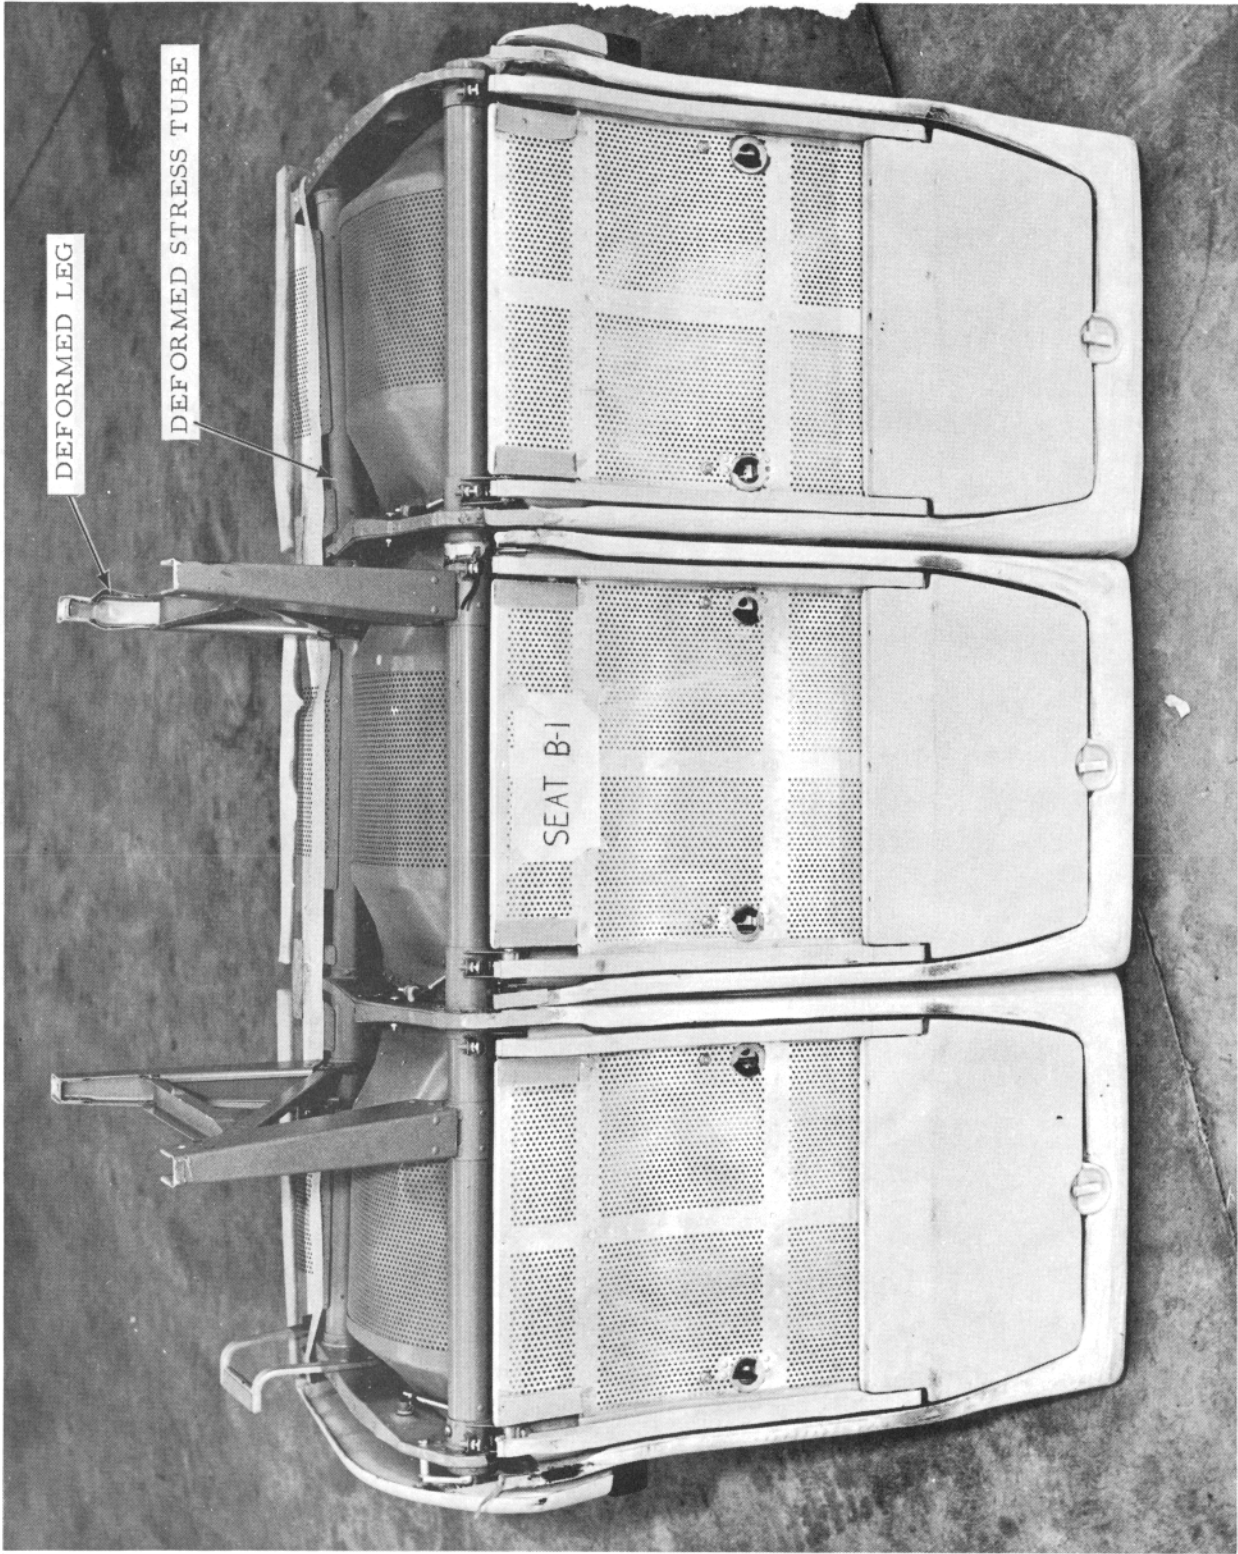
REAR VIEW OF SEAT B-1 AFTER TEST NO. 37
